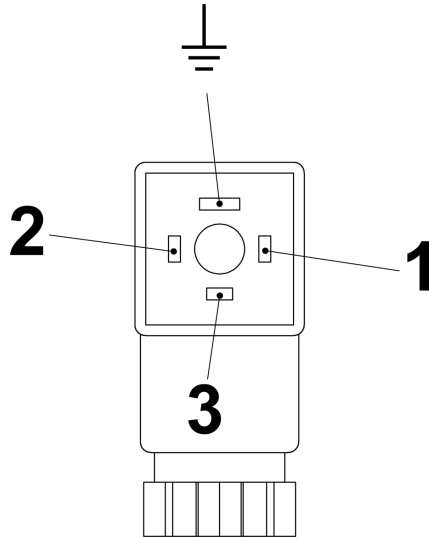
Pin assignment, plug socket, change-over contact (Form 15x50)
